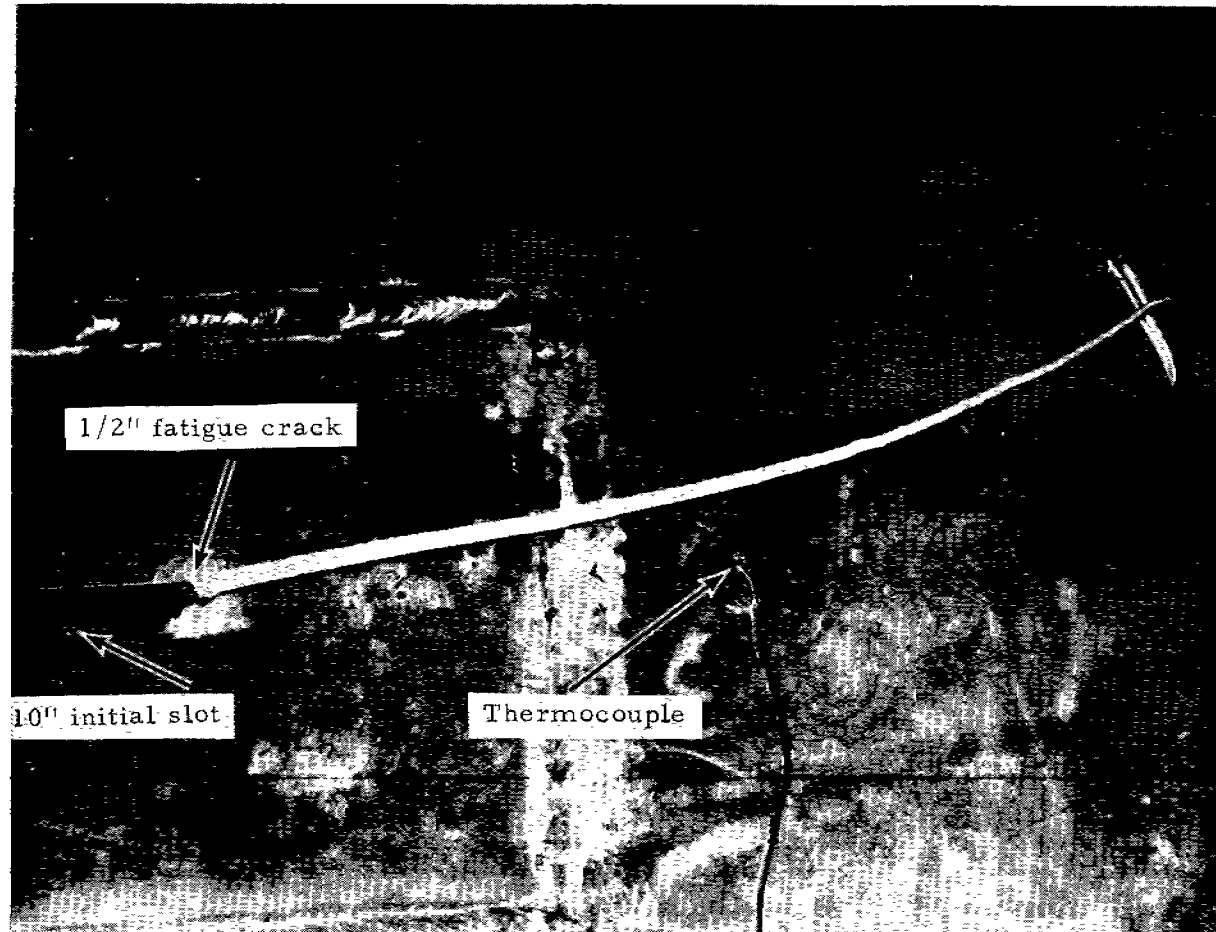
View Of An Arrested Crack - Test A17; Configuration: Fatigue Crack At End Of A 10" Edge Slot; Test Temperature: +35°F; Stress At Arrest: 46,500 Psi On The Gross Section (46,500 Psi Is The Specimen Yield Stress).
